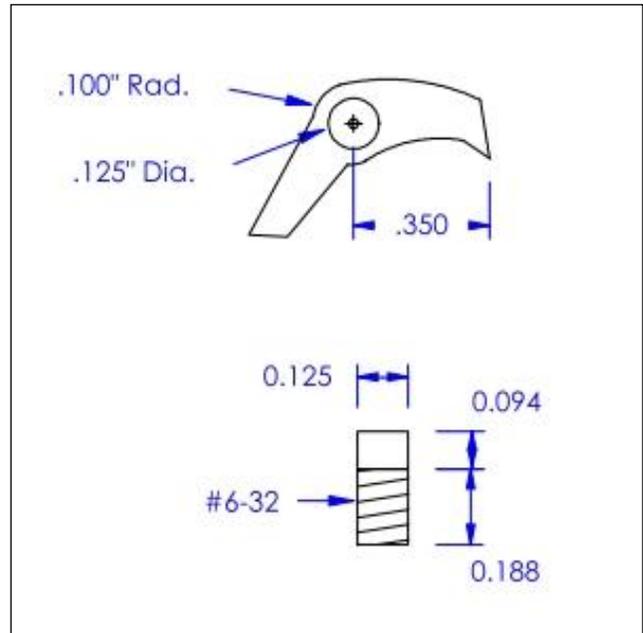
Construction drawing of the fusee click and click stud. The click is made from $3/32''$ tool steel. Other than the pivot hole, all other dimensions are determined by test fitting the click into the available space.
